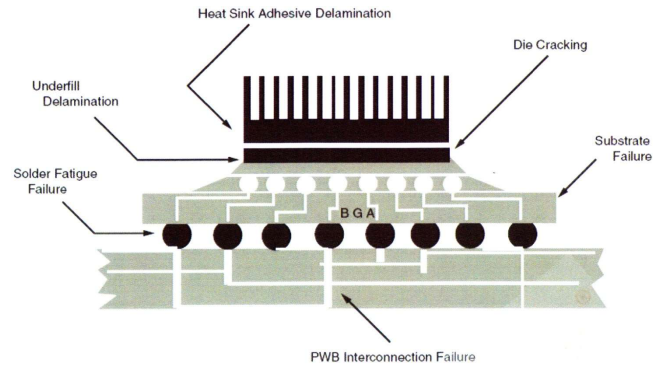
Typical failure modes in a FC PBGA package.
